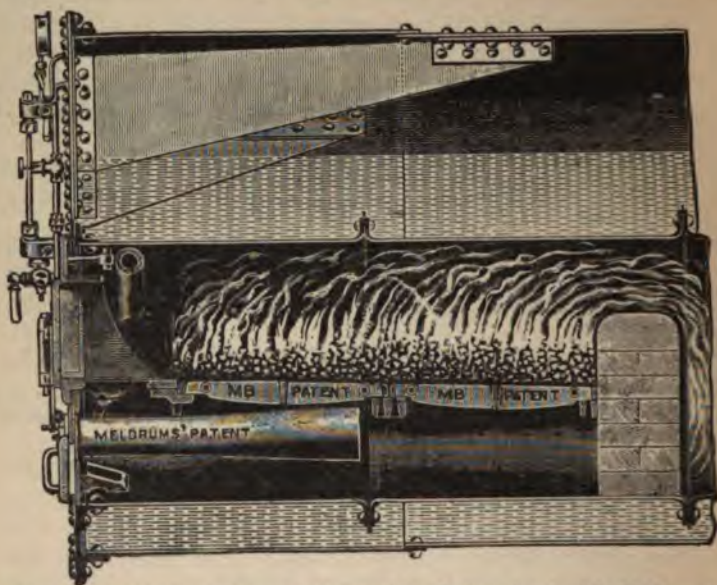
Longitudinal Section of a Lancashire Boiler, fitted with Meldrum's Fire Bars and their Steam Jet. The Steam Jet is fixed inside the Trumpet shown in the Ash-pit, the Steam being taken from the Boiler and superheated by being passed through the Tube shown, in the front of the Furnace.
